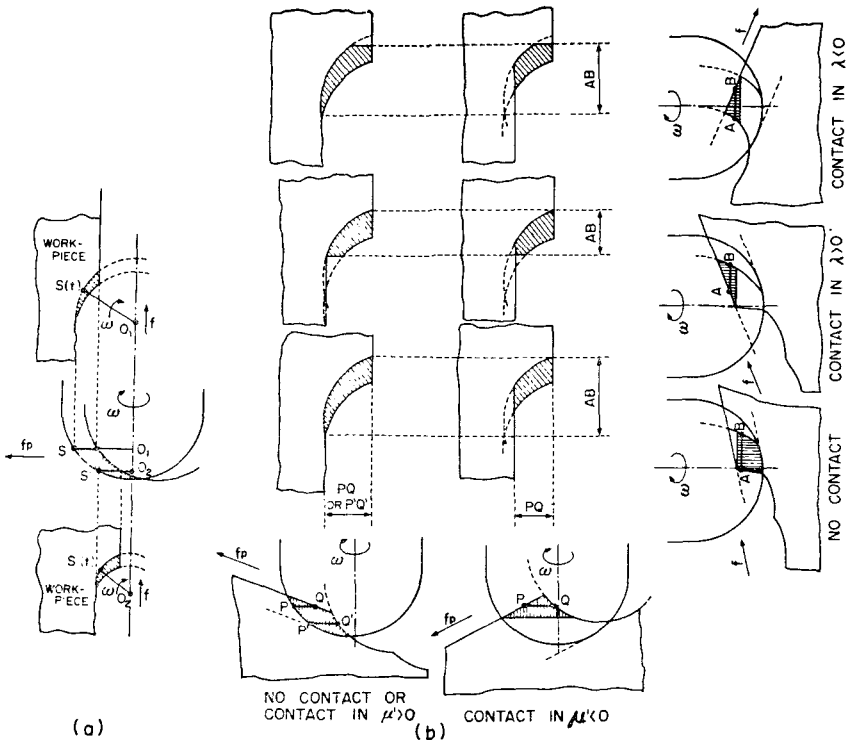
Machining process type of arbitrary cutting edge due to contact with presurface
